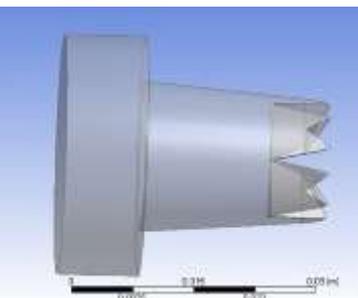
Three dimensional view of M Lobe chevron nozzle model
